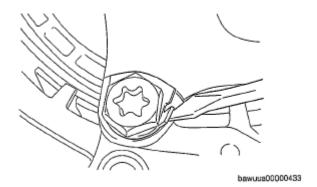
Prying Back The Crimp Locking The Lockwashers Courtesy of MAZDA MOTORS CORP.
